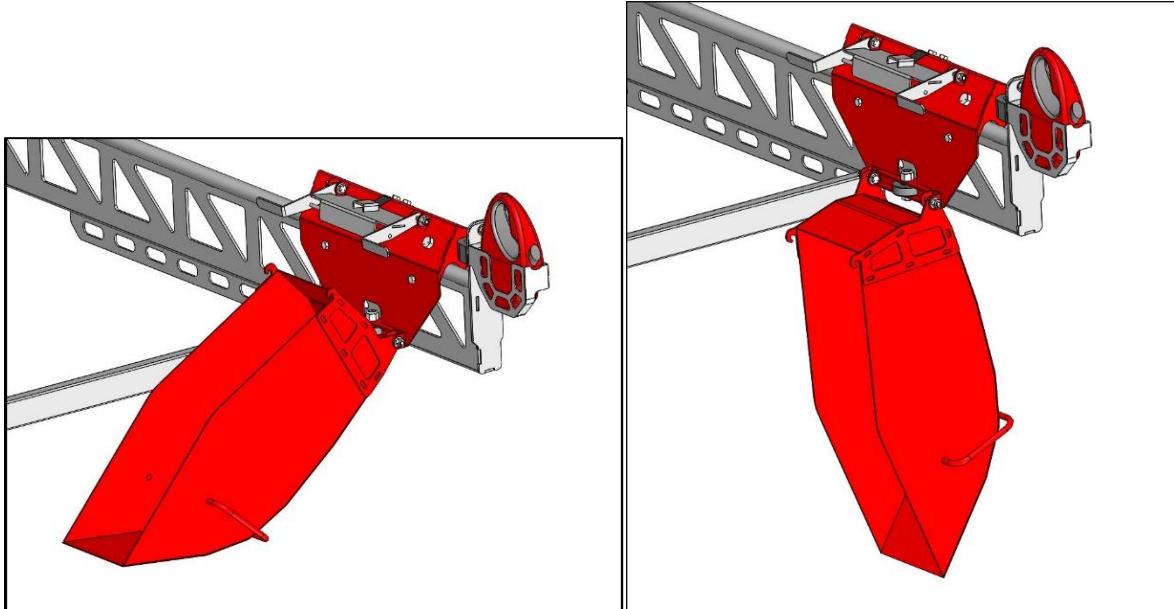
Latch Shown Improperly Seated – Can Cause Unwanted Bucket Dumping
